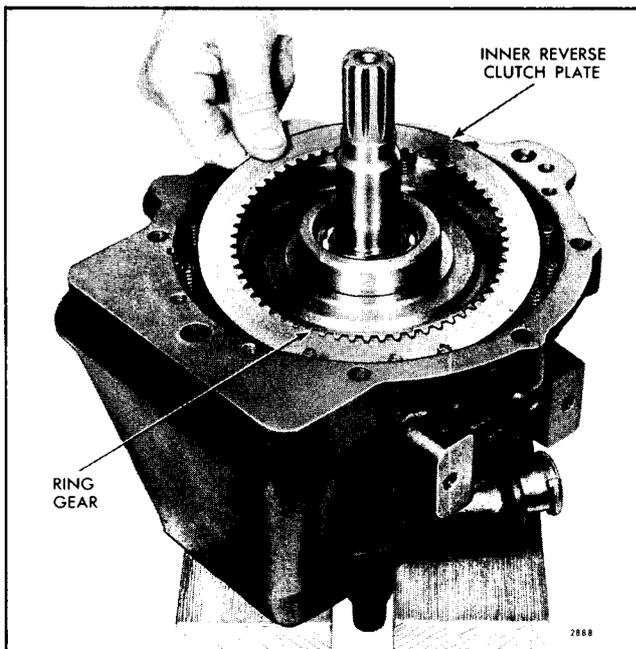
Installing Inner Reverse Clutch Plate in Gear Housing
